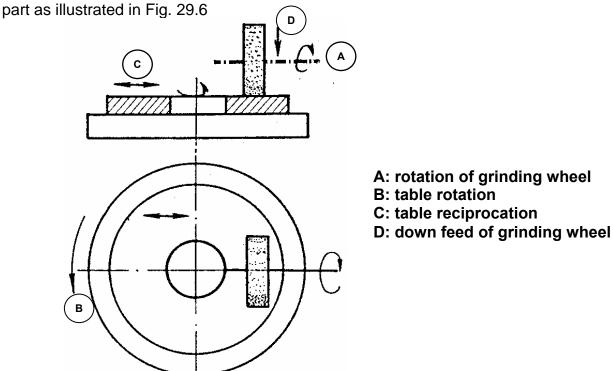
Surface grinding in Horizontal spindle rotary table surface grinder
